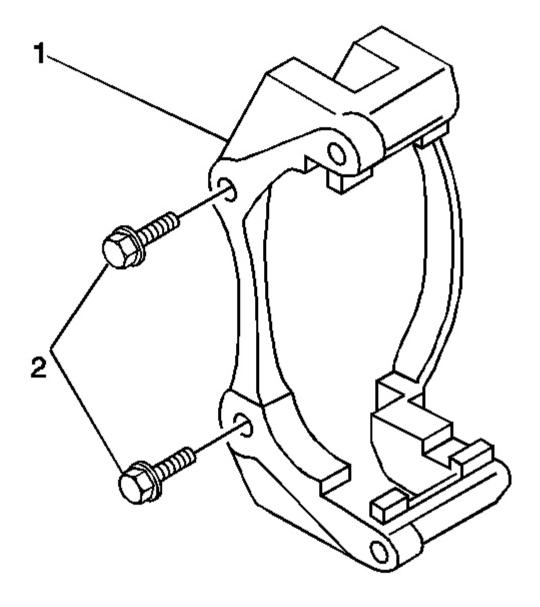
Removing/Installing Brake Caliper Bracket Courtesy of GENERAL MOTORS CORP.
